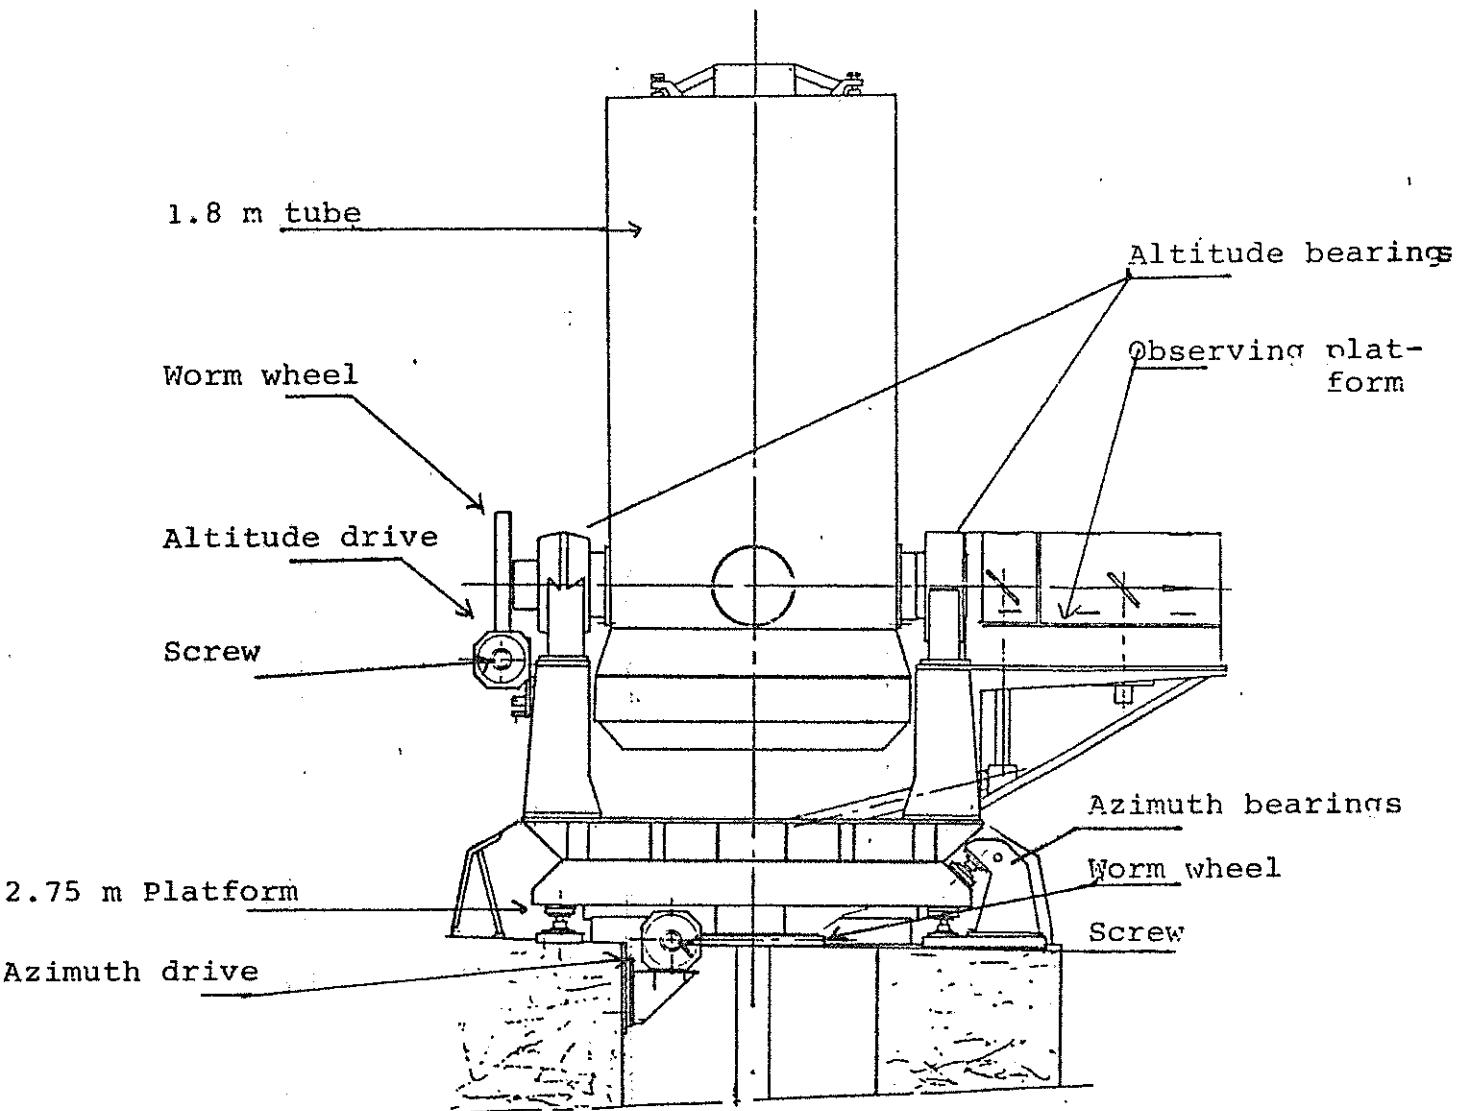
SCHEMATIC DRAWING OF THE STRUCTURE
